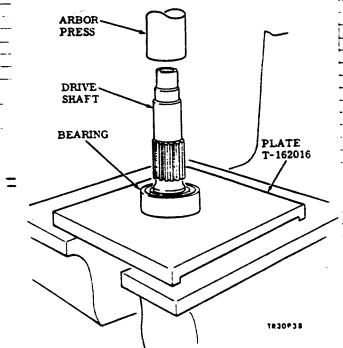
Assembly of Drive Shaft Bearing to Drive Shaft
